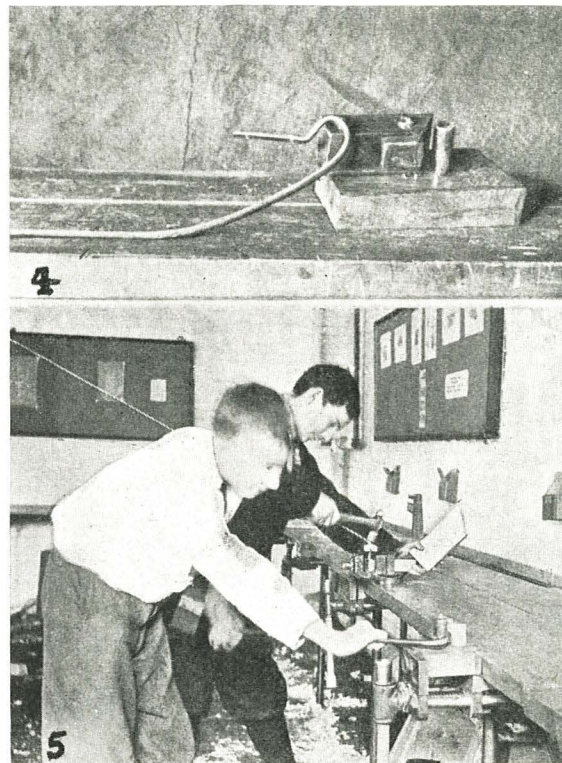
Bending Fixture and a Sled Runner Bent with it.
